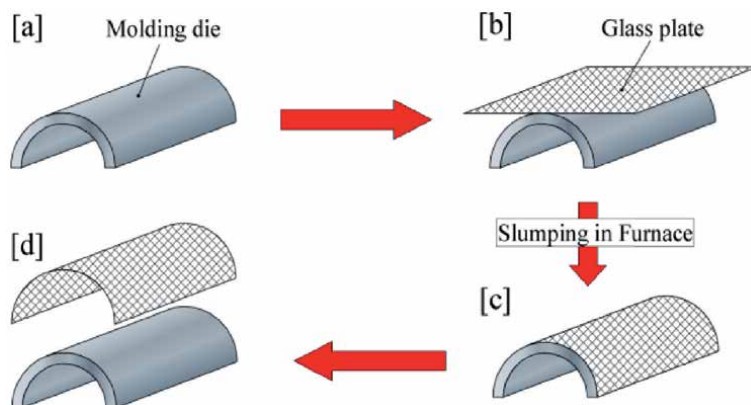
Outline of the glass forming techniques “slumping method”. (a) Preparation of molding die. (b) Processing set up. (c) Demolding process. (d) Deformation process.
